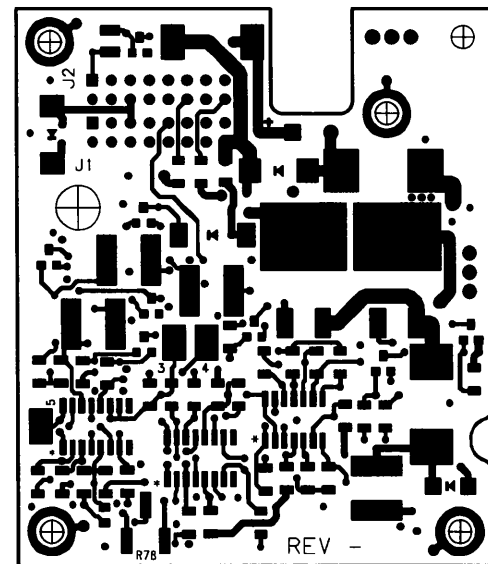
SERVO BOARD ASSEMBLY DWG 300-09835-0000 (Dwg No 300-09835-0000, Rev -, Sheet 1 of 1)
